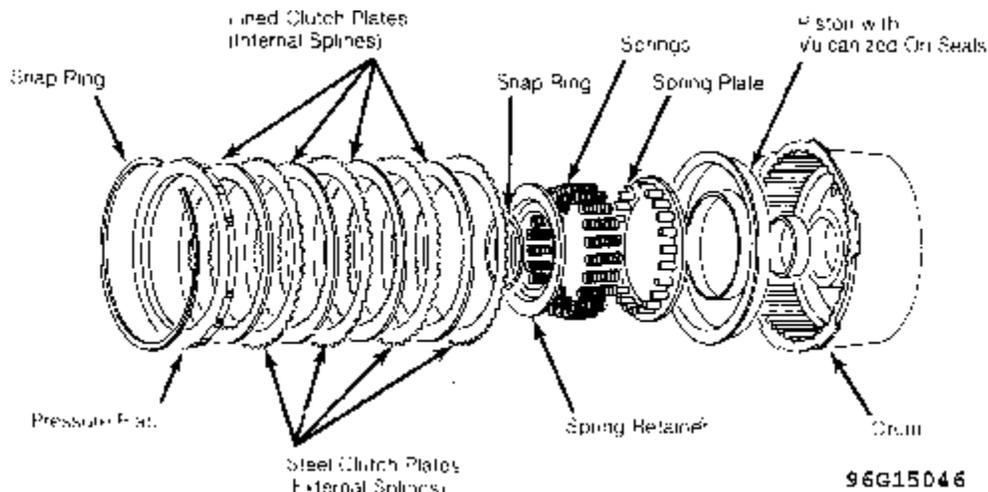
Exploded View of Model 089 Direct-Reverse Clutch Assembly
